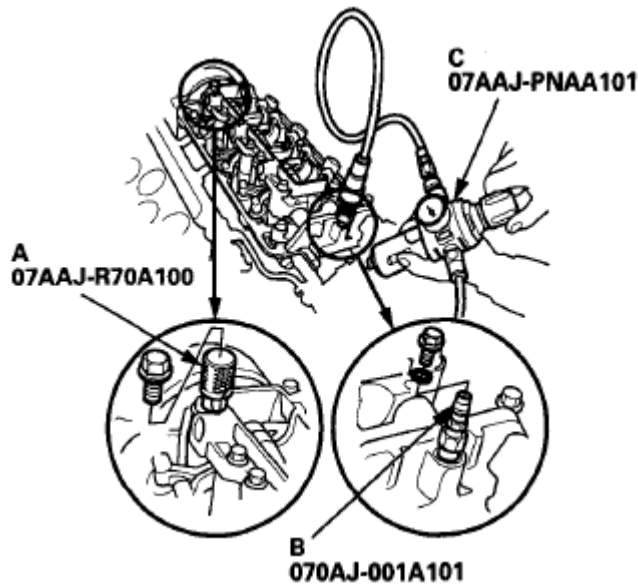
Identifying VCM Air Adapter And Air Pressure Adapter - Rear
